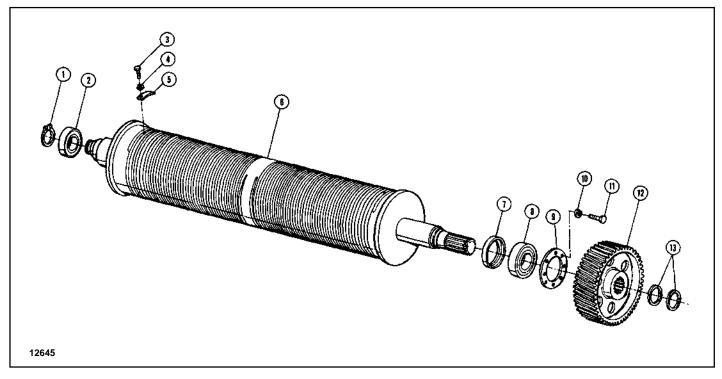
Drum, Gear and Bearings for DMR-1 and DMR-2
